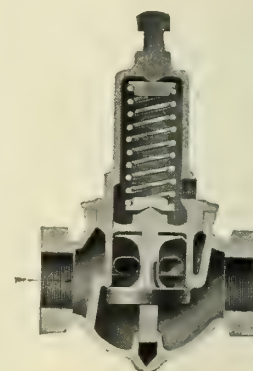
FORD WATER PRESSURE REDUCING VALVE
